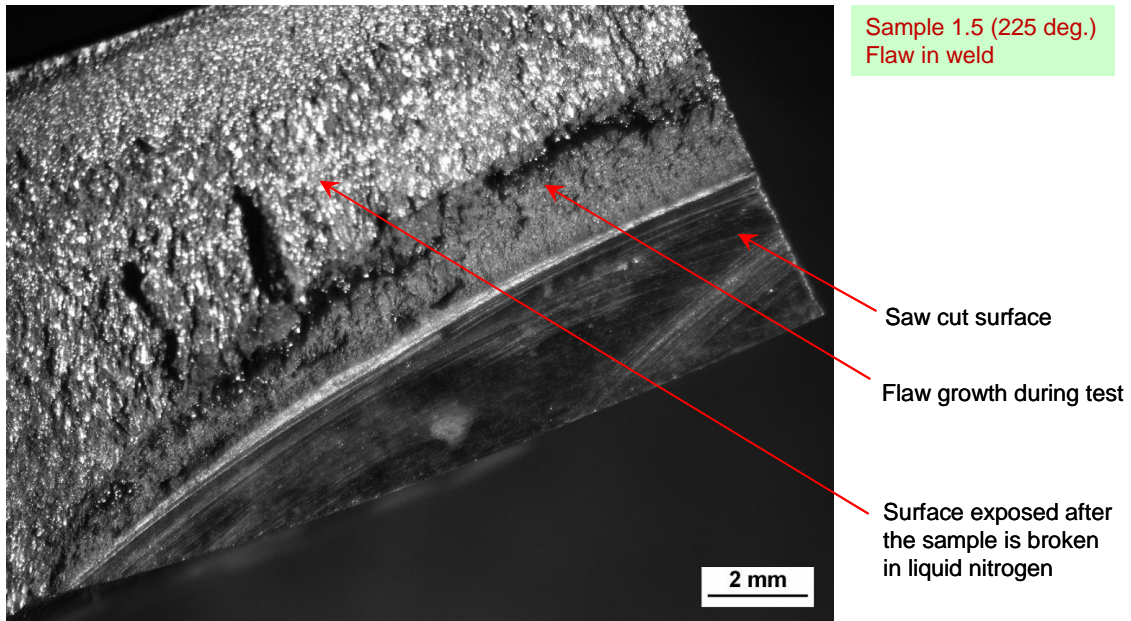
Fracture surface of a flaw located in the weld centerline
